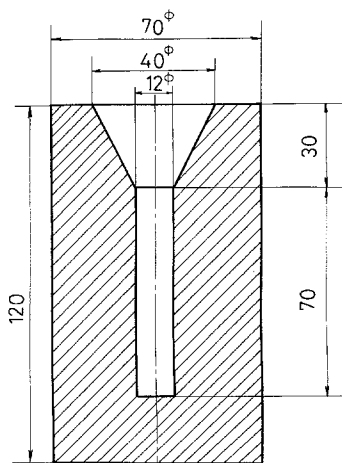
Schematic illustration of the mould together with its dimensions in mm.
